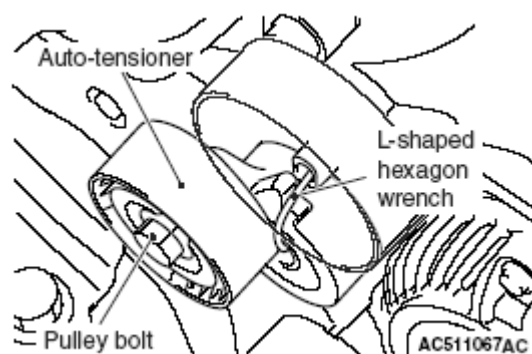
Identifying Pulley Bolt And Auto-Tensioner
